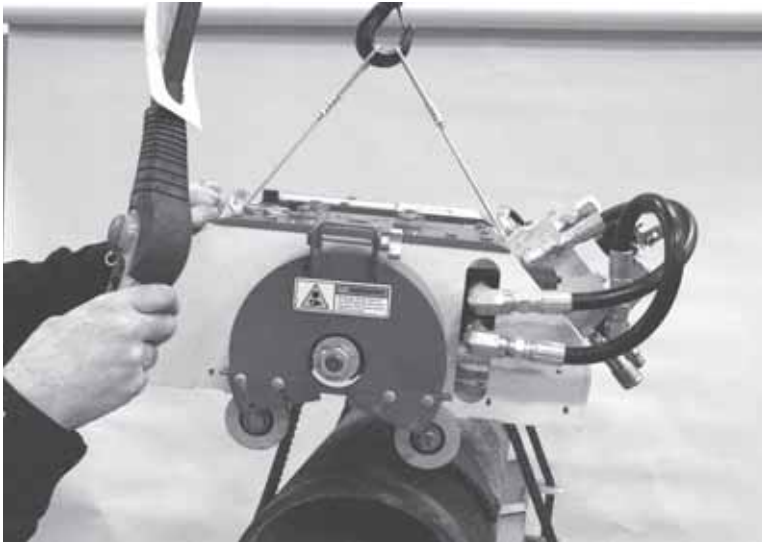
Disconnect hydraulic power by removing the hydraulic hoses from the fittings on the machine.
